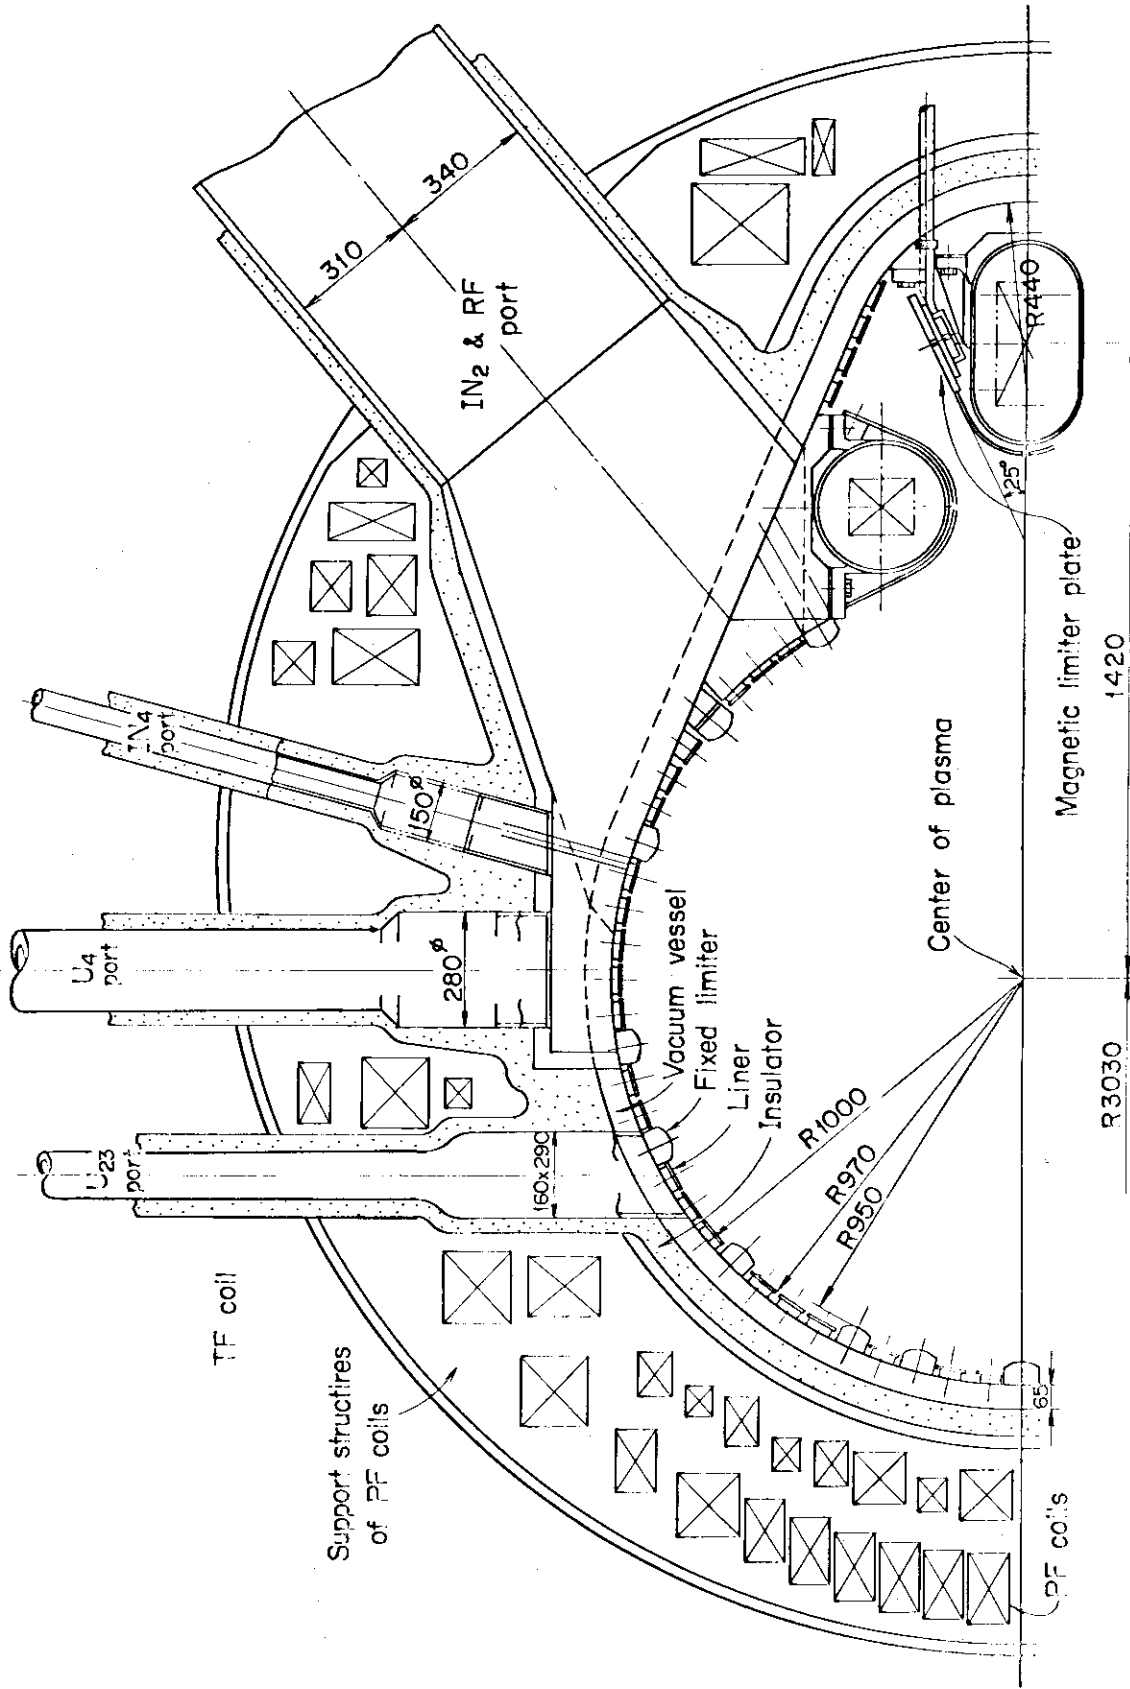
Cross sectional view of a vacuum vessel.
